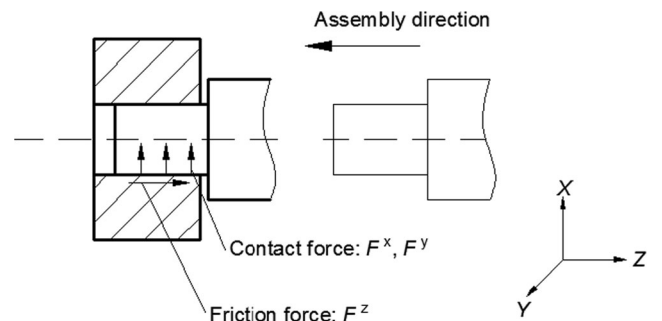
Illustration of virtual assembly force of a shaft-bushing assembly operation
